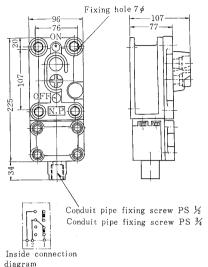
Outline of flame-proof 2-points push button switch, dRC 4001 -IIP
